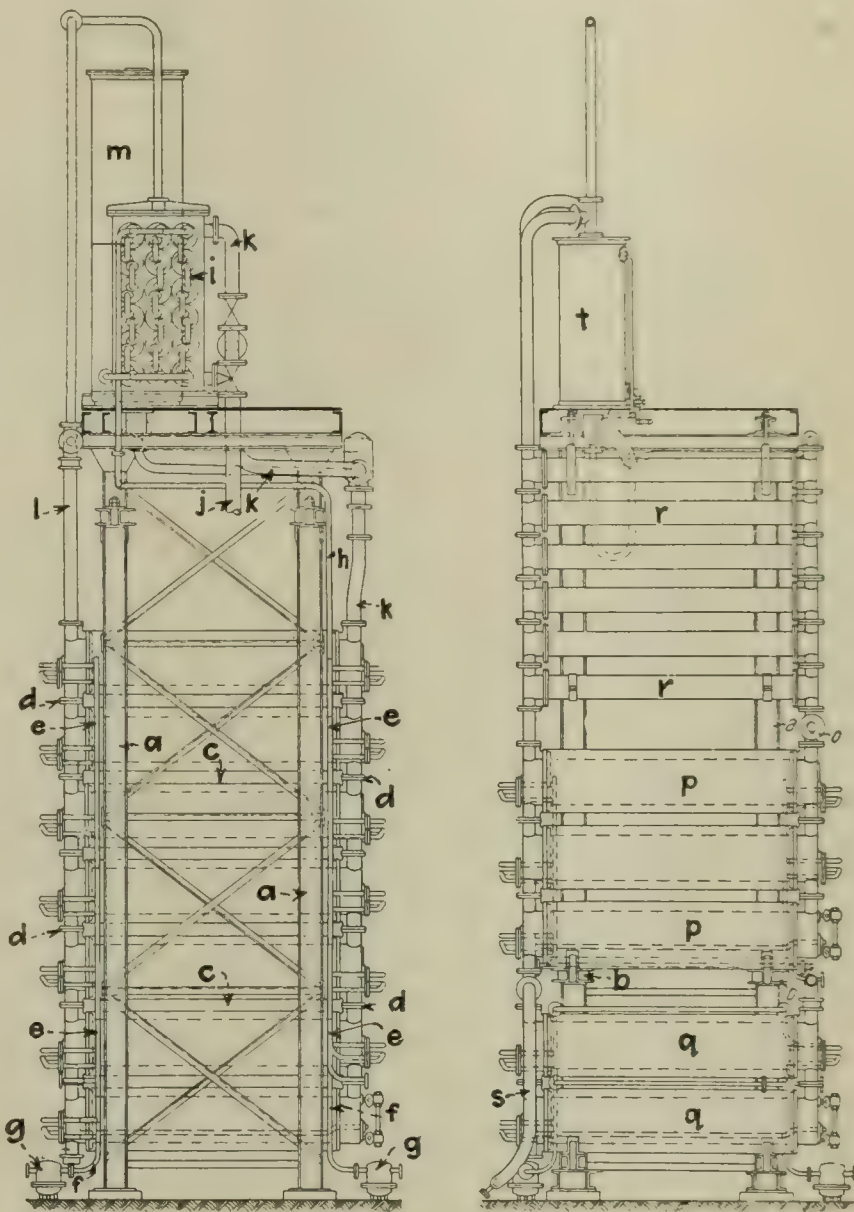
FRONT VIEW OF ASSEMBLED STILL
